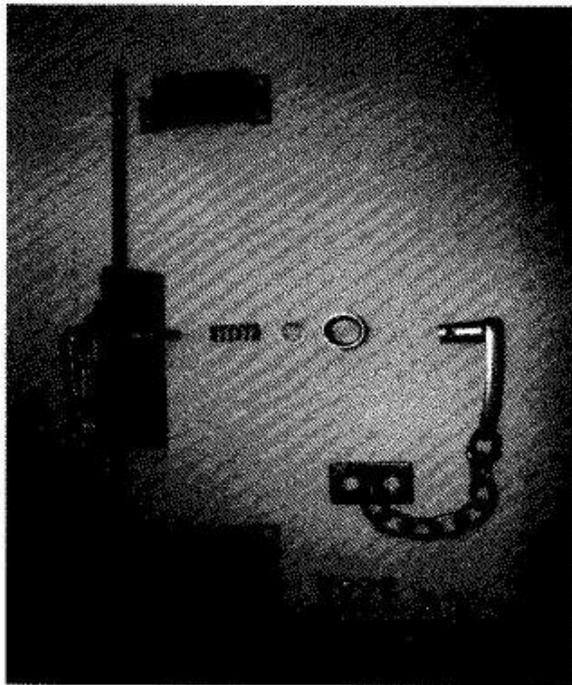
Drill only, bear-proof latch kit by Boxmaster for adaptation on 23-cubic foot SecureStore food locker.
